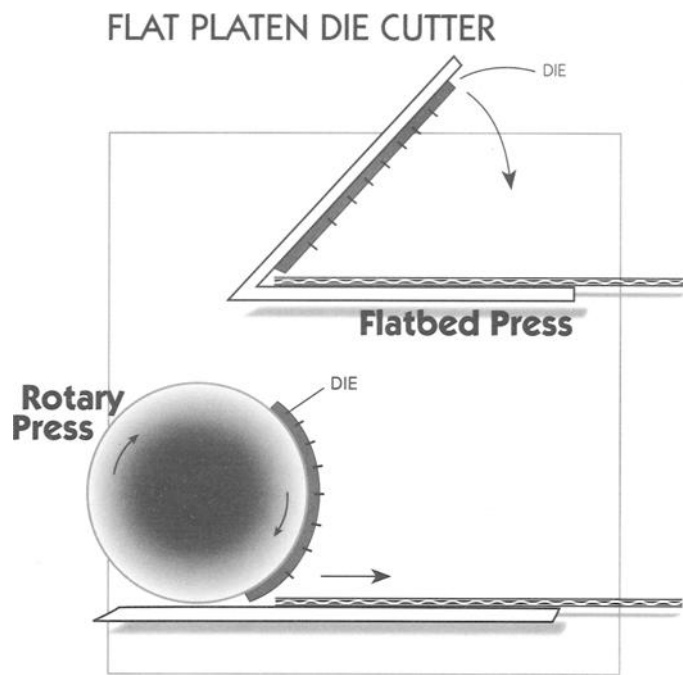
The general mechanisms for a flat platen die cutter and a rotary press cutter.
